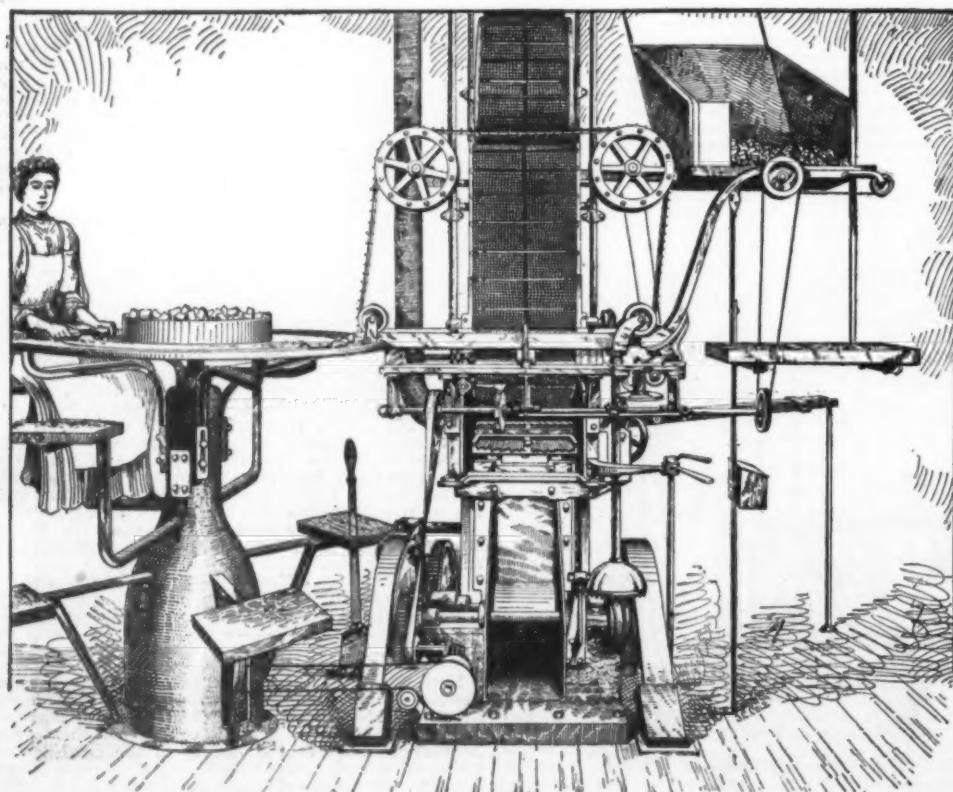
FRONT VIEW OF MATCH-MAKING MACHINE.
